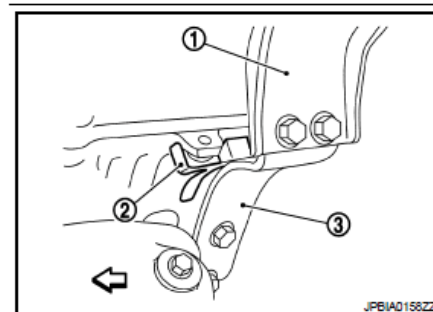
Identifying Engine Rear Lower And Upper Slinger
